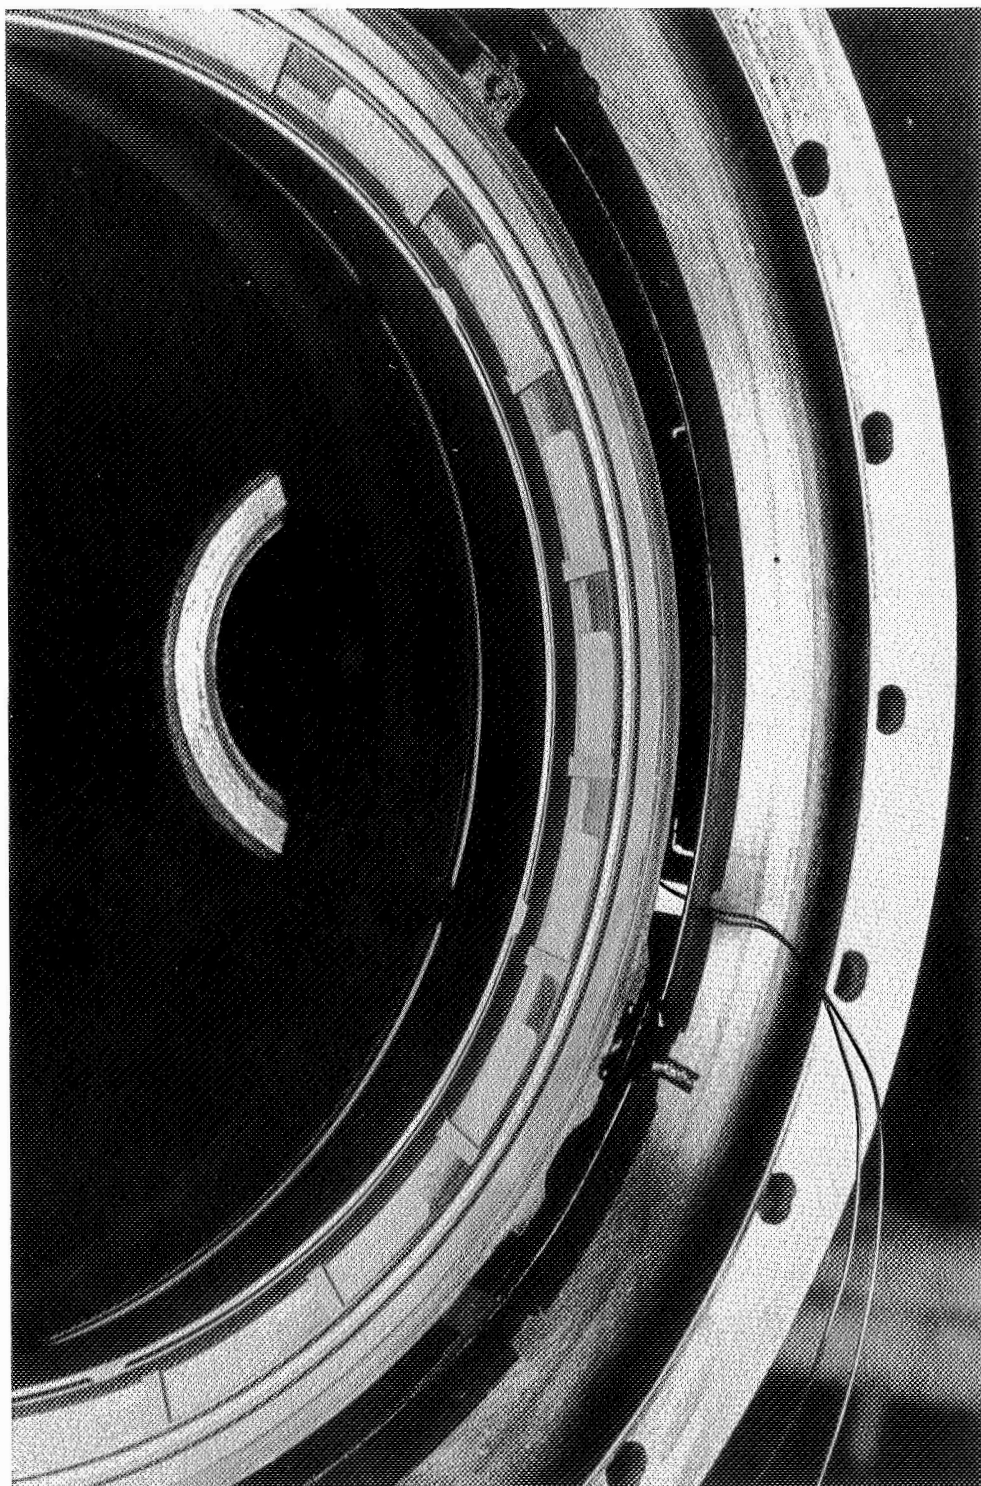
Build 2 of the Gas-Film Seal Assembly After 100-Hour Endurance Test. Total Time on Seal 171.2 Hours (CN-22282)
